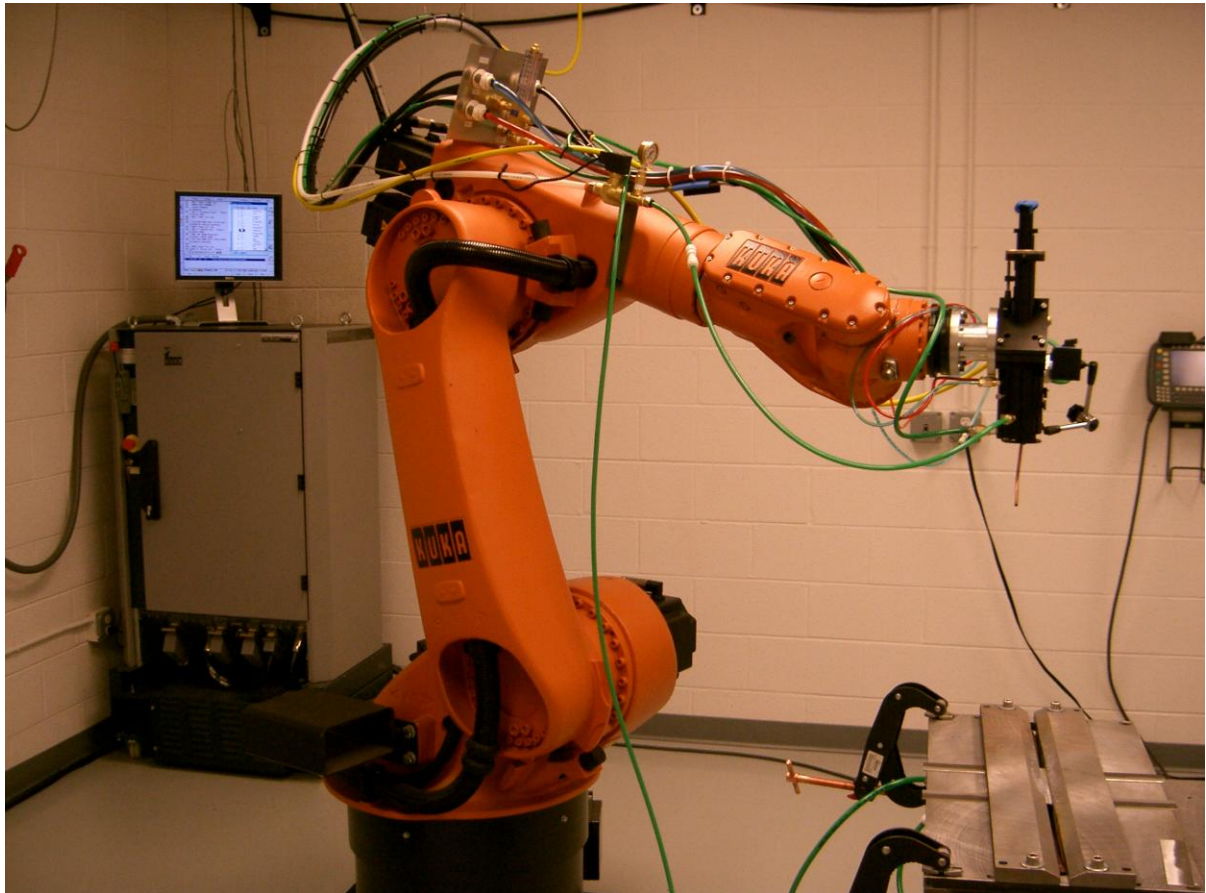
Fibre laser controller, KUKA robotic arm, mounted laser head, and welding table with clamping device.
